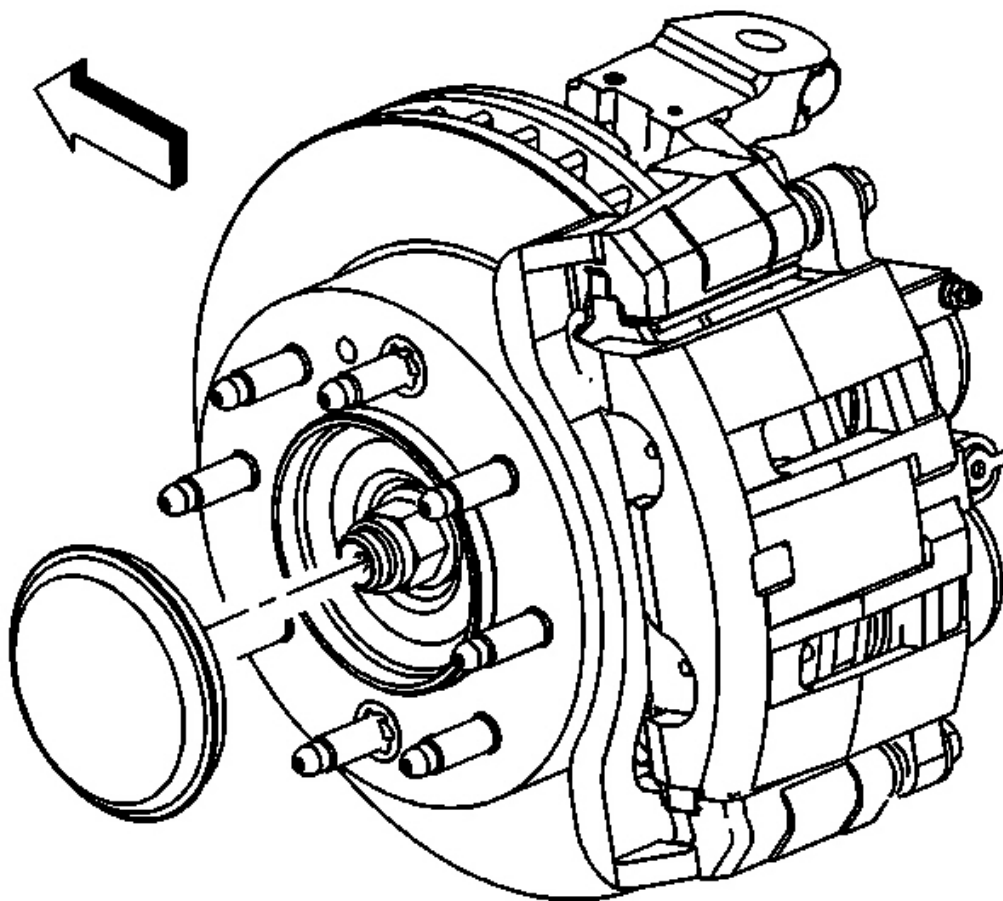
Removing The Wheel Drive Shaft Nut Retaining Cover (4WD)
